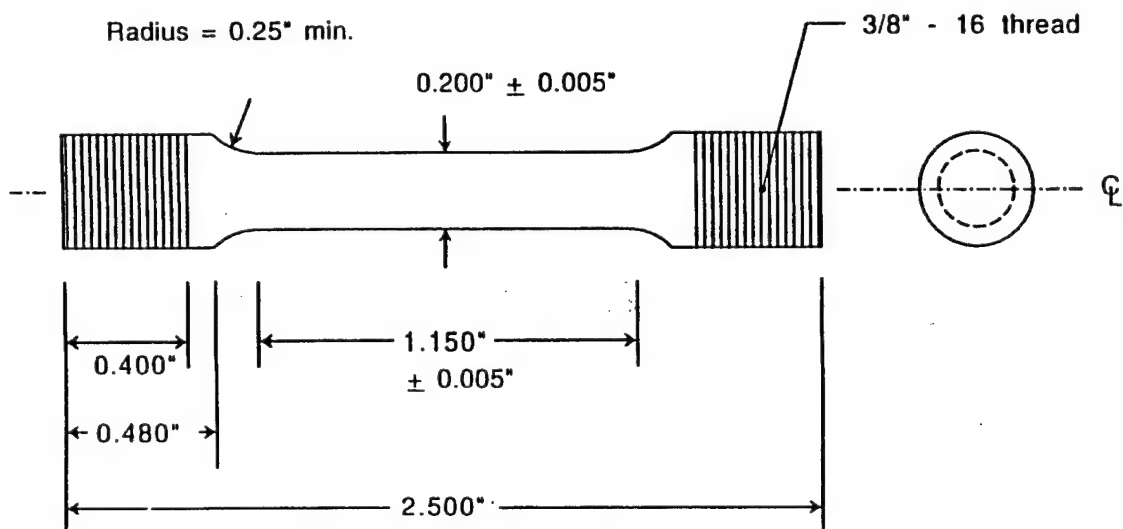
A typical specimen geometry, containing a cylindrical gage section, used for the tension and tensile-creep experiments.
